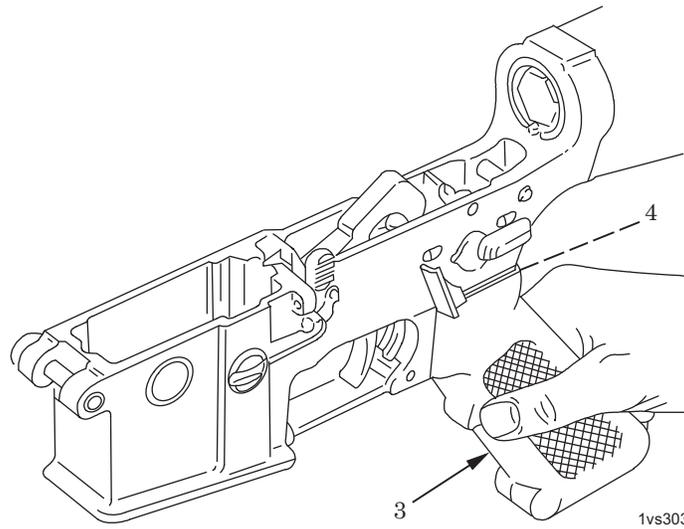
Positioning Pistol Grip with Lock Plate Installed.
